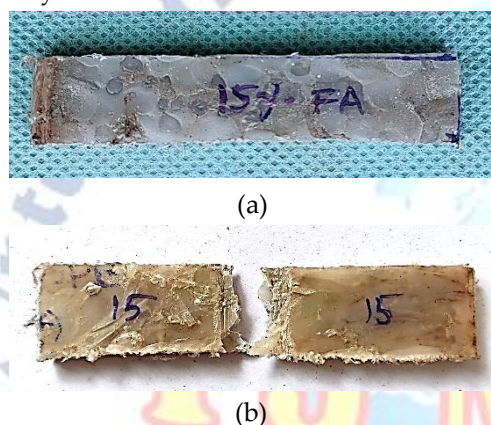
(a) Impact test specimen (b) Tested Specimen of Impact test
